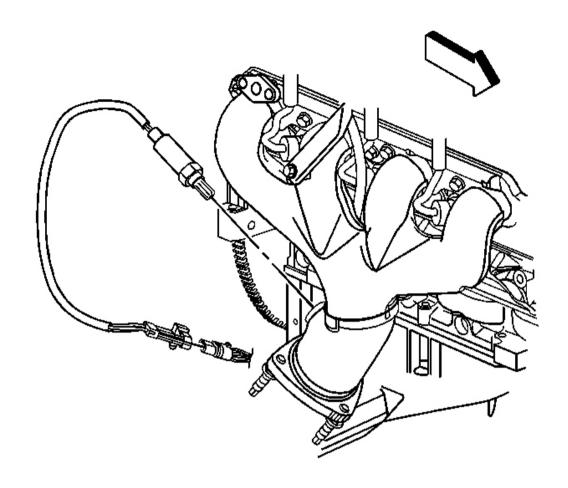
Oxygen Sensor Electrical Connector & CPA Lock Courtesy of GENERAL MOTORS CORP.
